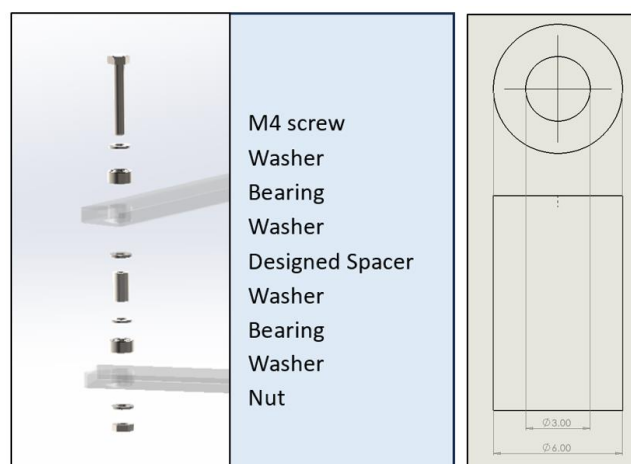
Exploded view of the joints connecting links and respective technical drawing of the designed spacer
